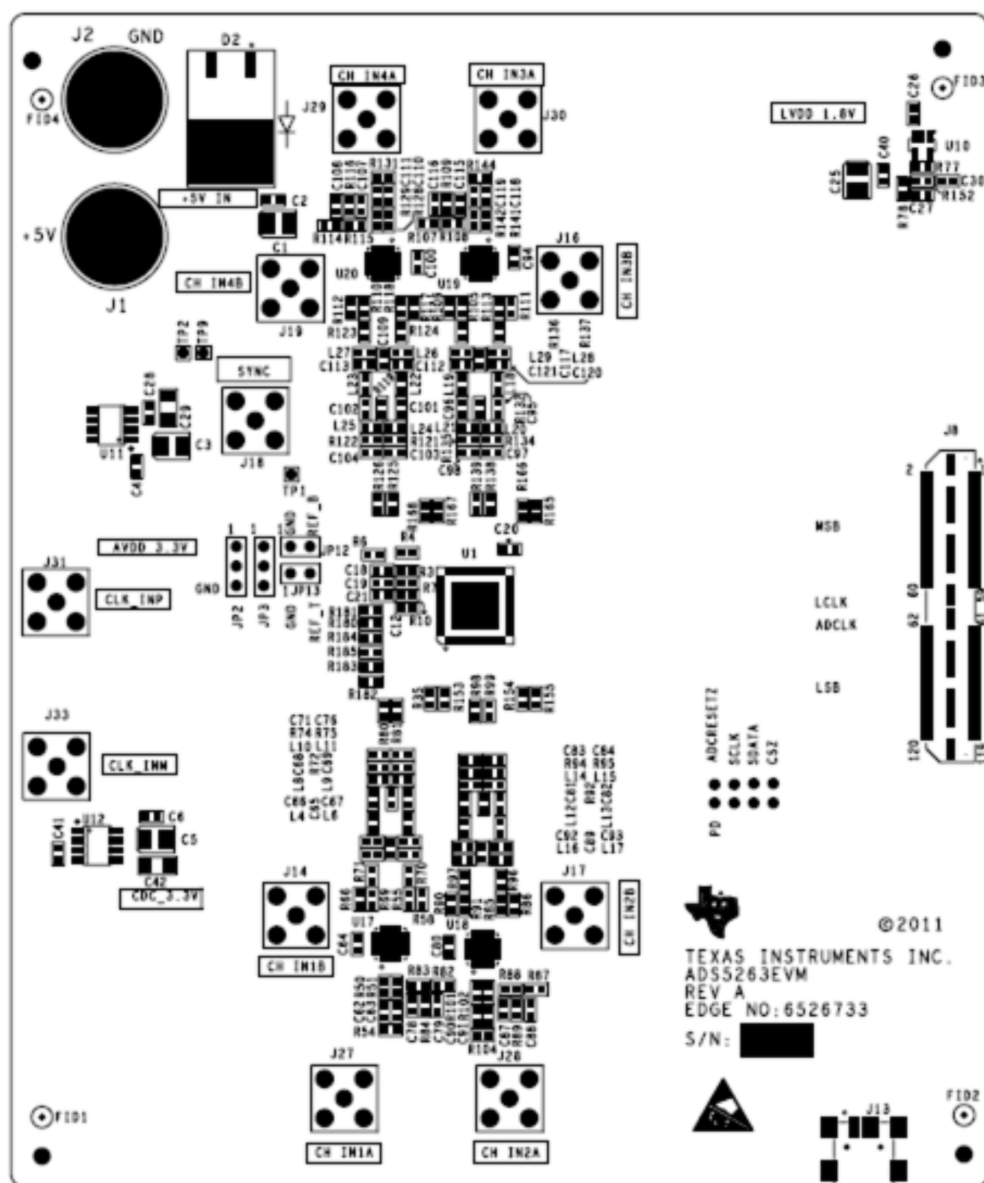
ADS5263EVM Top Layer Assembly Drawing – Top View
